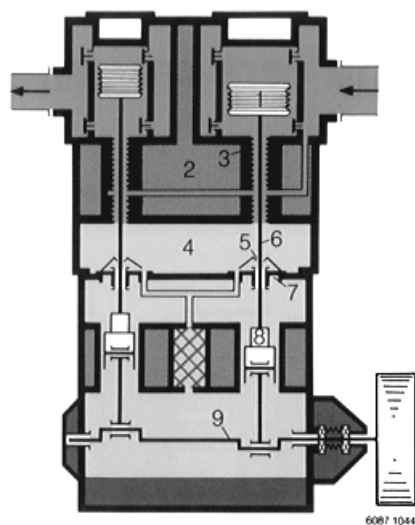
Labyrinth piston compressor with a gastight and pressure-tight crankcase and a mechanical crankshaft seal. Used to compress gases that are compatible with the lubricating oil and where no process gas may leak to the surroundings. Suction pressure may range between subatmospheric and crankcase design pressure. This machine finds its applications in closed cycles, for hydrocarbon gases, refrigerants, VCM, CO, N₂, CO₂, He, H₂, Ar, etc. (*Sulzer-Burckhardt, Winterthur and Basel, Switzerland*)
